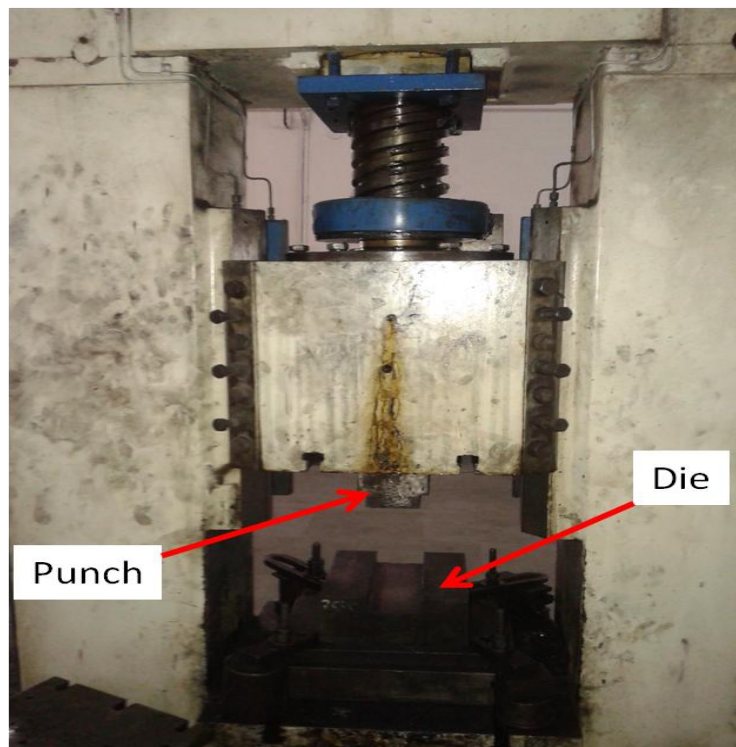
Die and punch placed in Friction screw driven forge press.
